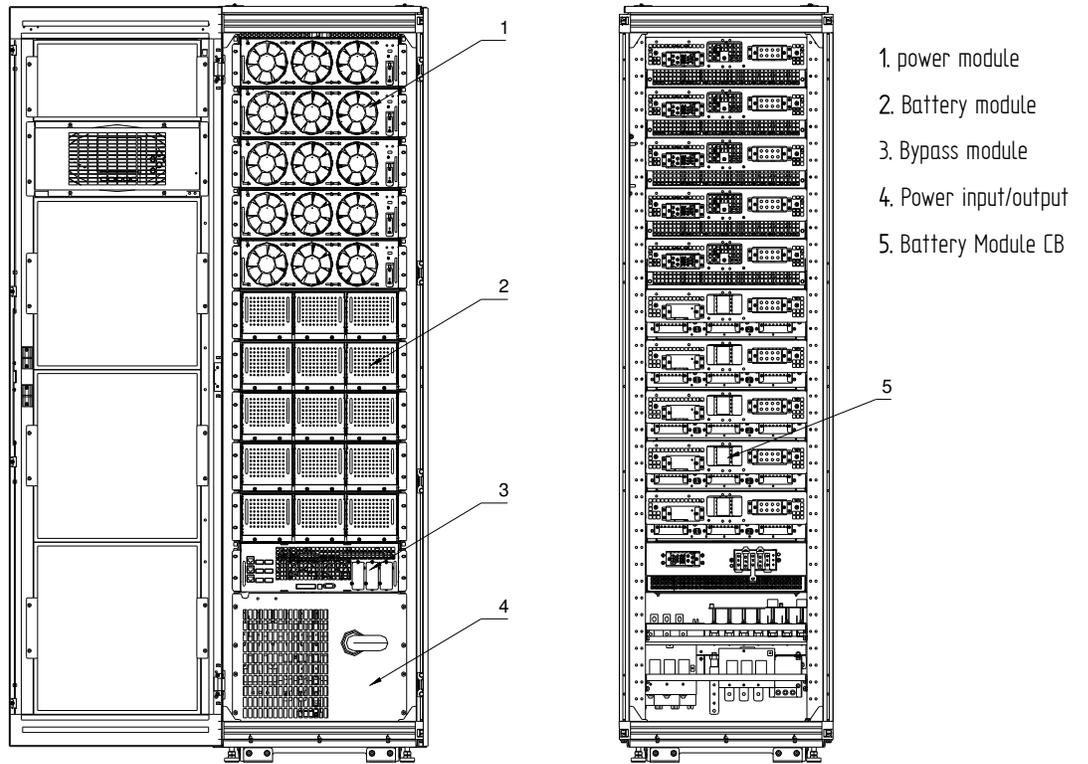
150kVA UPS module system, front view whit open door and back view without doors
